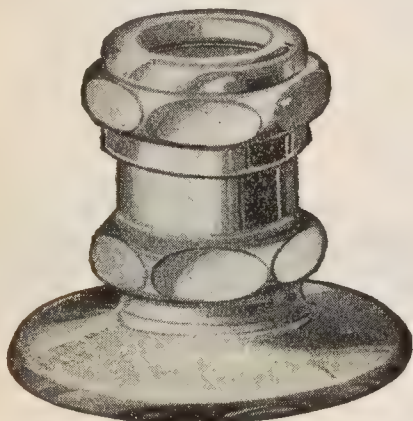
,410 to 7,417.—Wolverine fine thread fittings. 3. Fig. 7,410, close nipple; fig. 7,411 space nipple; fig. 7,412, flange; fig. 7,413, plug; fig. 7,414, collar; fig. 7,415, bushing; fig. 7,416, collar with shoulder; fig. 7,417 stamped collar with solder joint.
